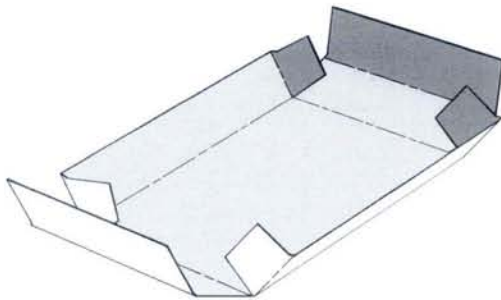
This illustrates the typical customer assembly steps for a machine formed single sidewall/double endwall, glued corner Brightwood tray.
